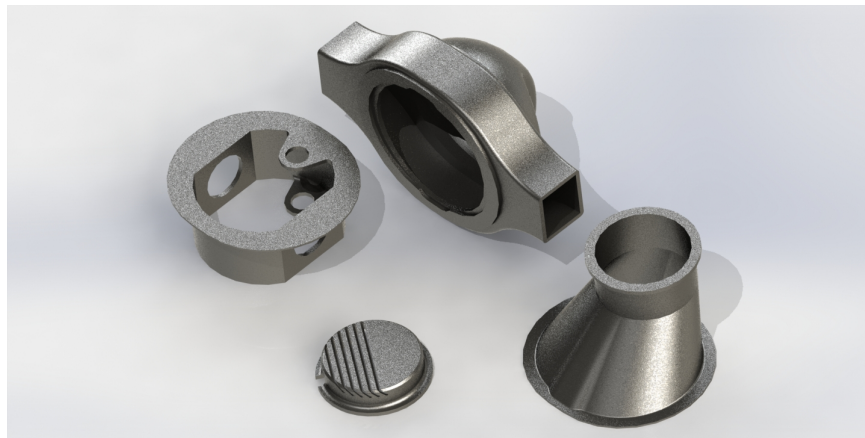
Counterclockwise from upper left: gearbox insert, covermount cap, motor covermount, and axle housing
